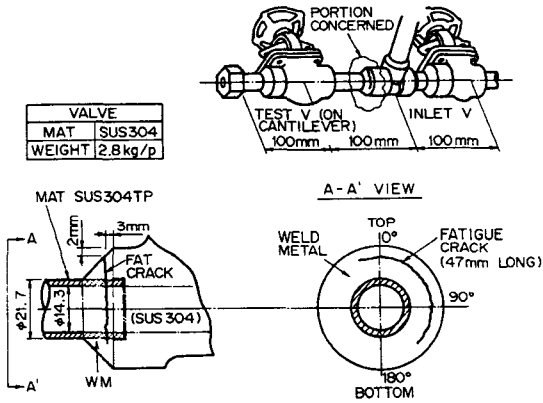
Fatigue crack started from root of socket welds.
